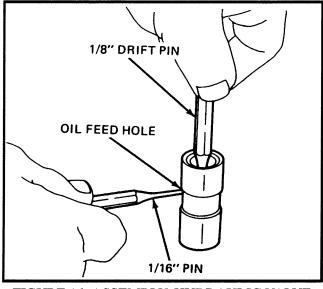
ASSEMBLY, HYDRAULIC VALVE LIFTER
